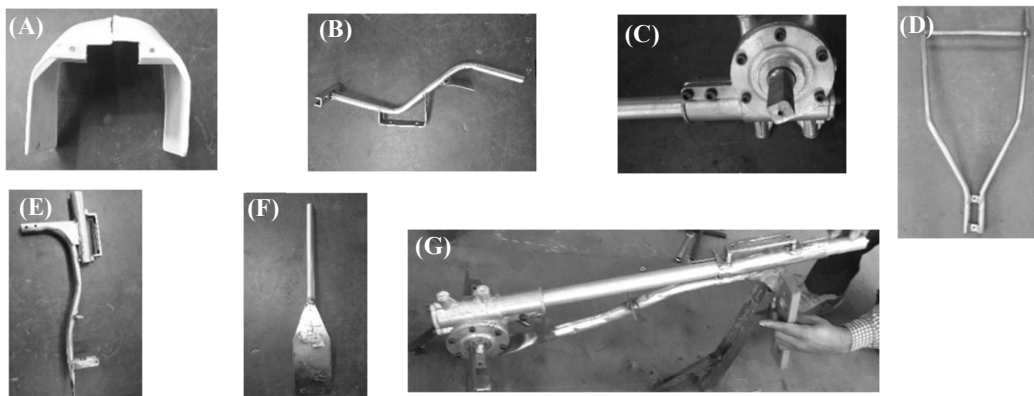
Different components of the power weeder showing; front mud guard (A), mud gurd holder (B), gear body (C), stand (D), main frame (E), handle (F) and cover pipe of the spline shaft (G).
